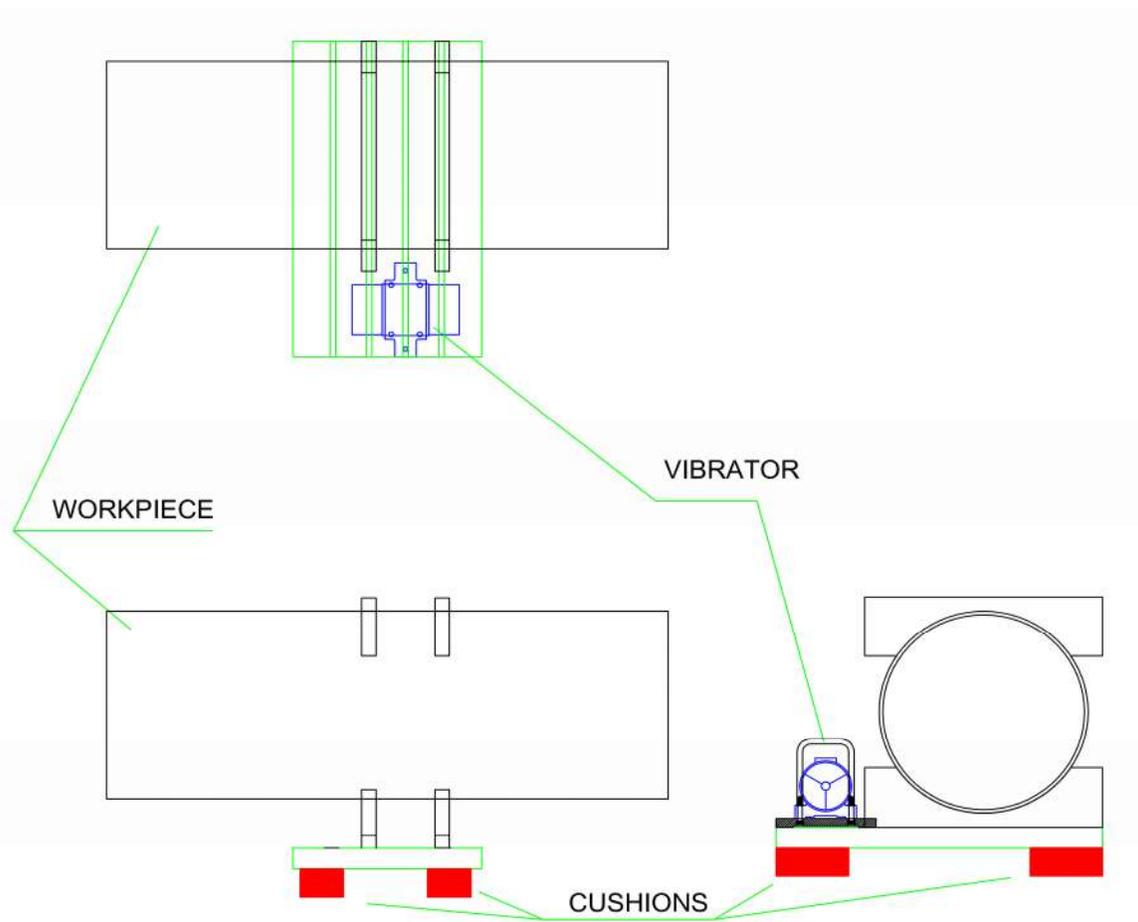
Drawing depiction of VSR Setup shows positions of fixture (green rectangle), vibrator, workpiece and cushions. Fasteners and accelerometer are not shown, for clarity.
